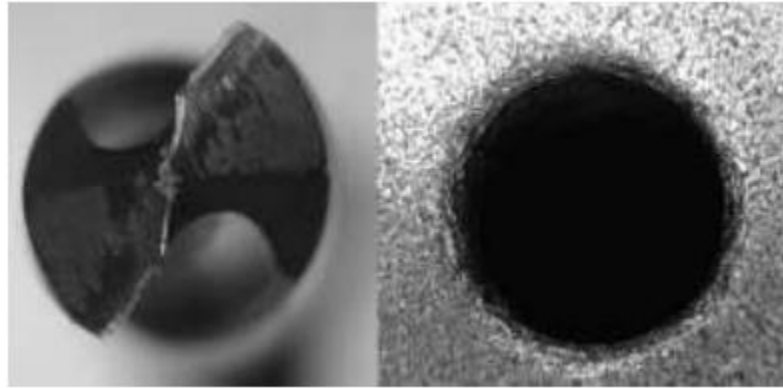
The top view of the drill bit of HARTNER HSS twist drill and hole after 16 through-holes with cool air coolant [15].
